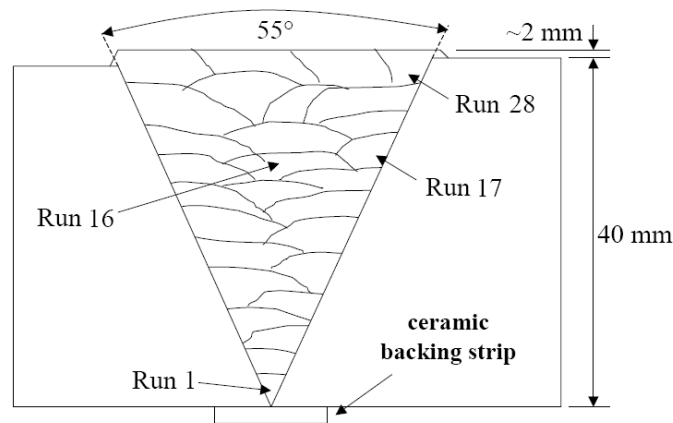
Schematic representation of weld preparation and location of weld runs.
